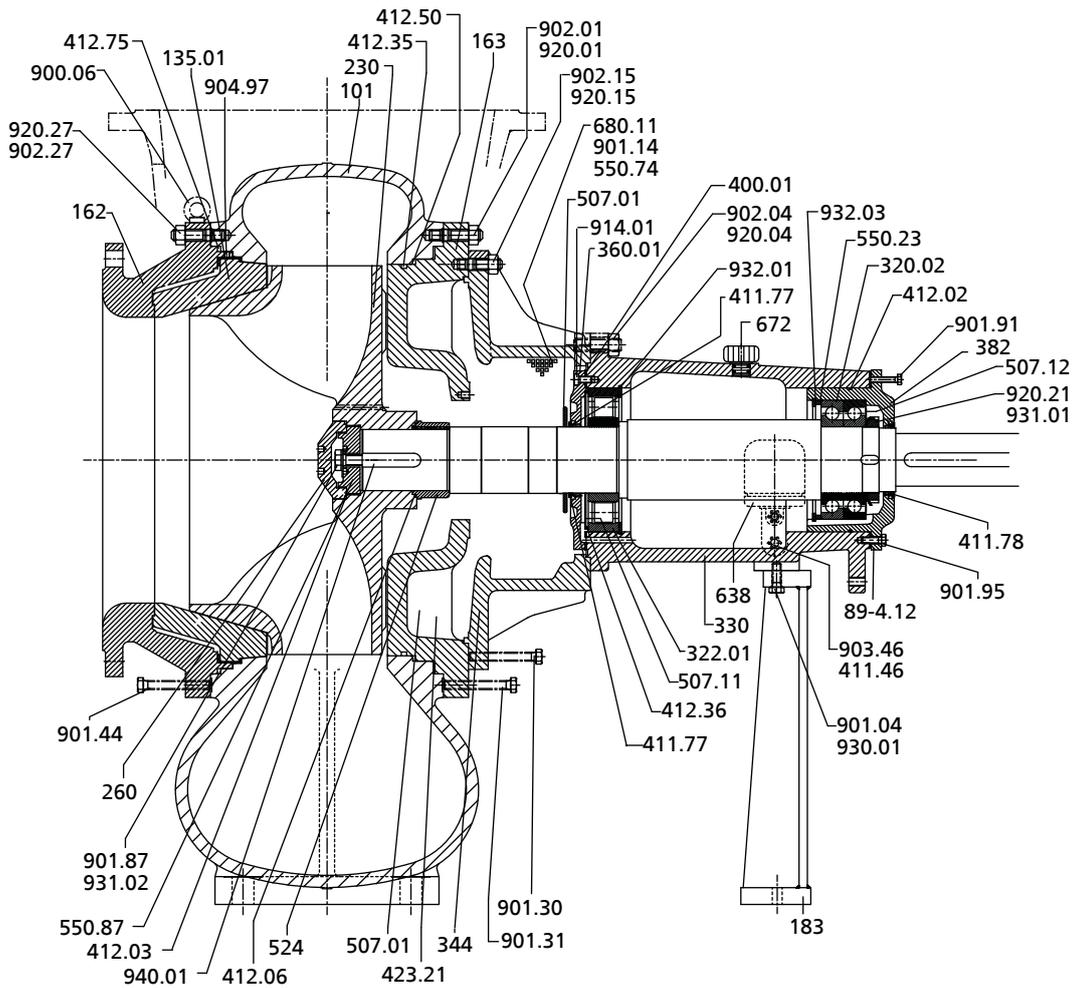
General assembly drawing of pump with bearing bracket P12sx: sizes 500-500-544, 600-660-663 and 600-600-669
